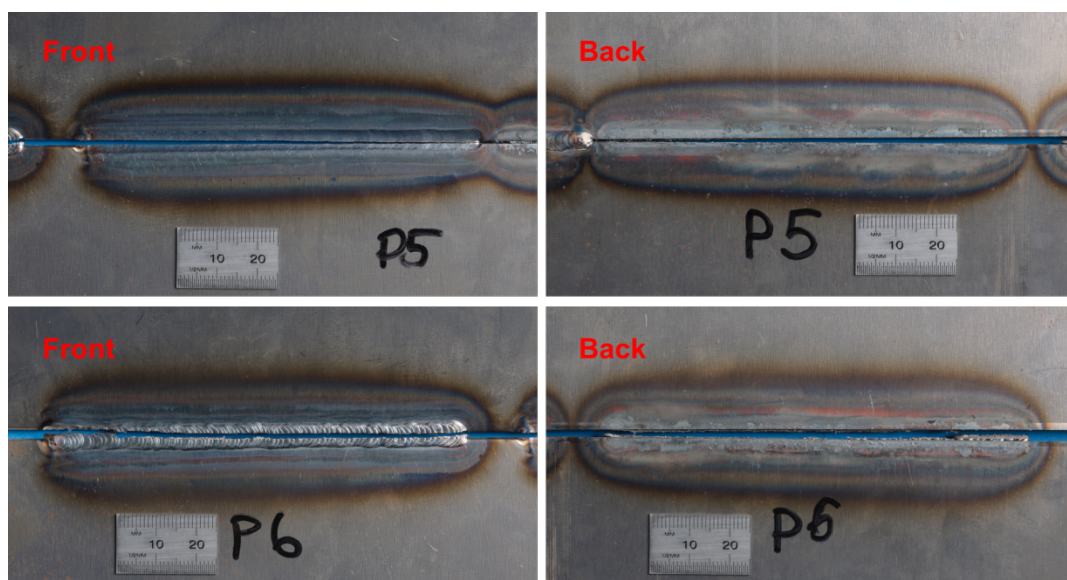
Welds with a crack located along the welding beam of pass 5 and 6.
